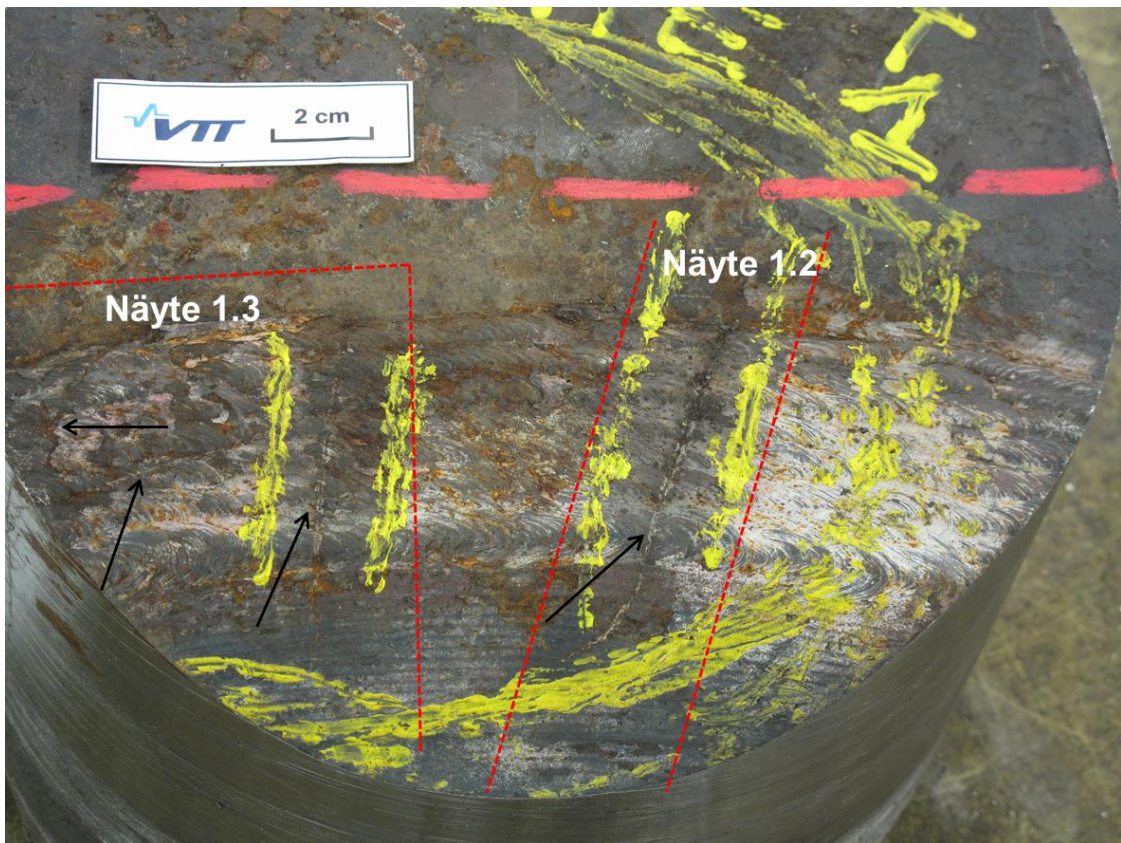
Transversal weld metal cracks at the outer surface of the specimen (denoted with black arrows).
